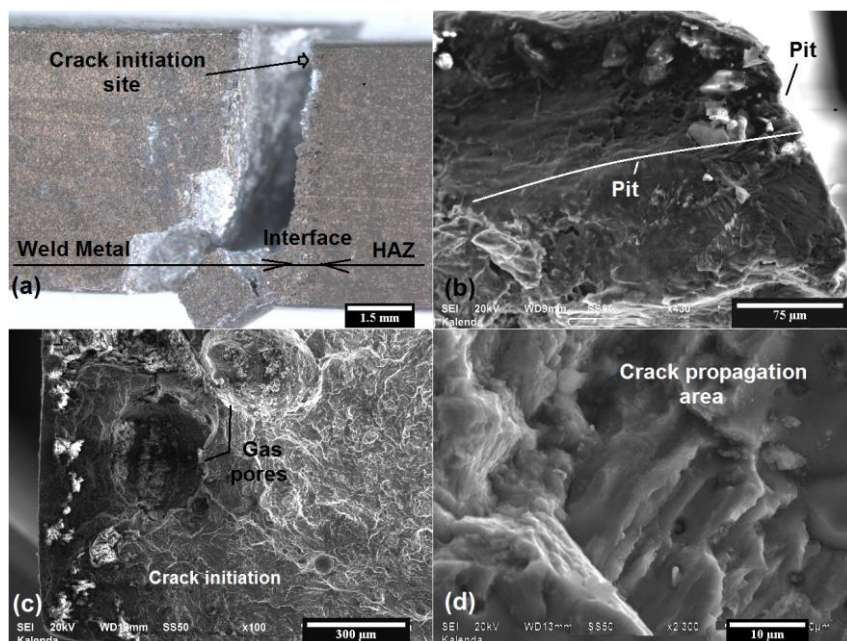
Typical fatigue fracture of 6061/ER5356 welds tested in a 3.5% NaCl solution: (a) failure at the interface between the weld metal and HAZ; (b) crack initiation from a corrosion pit; (c) crack initiation from corroded gas pores; and (d) crack propagation.
